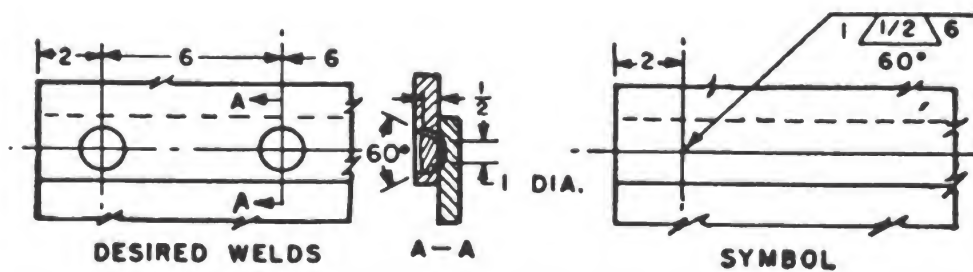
Plug welding symbol showing use of combined dimensions.
